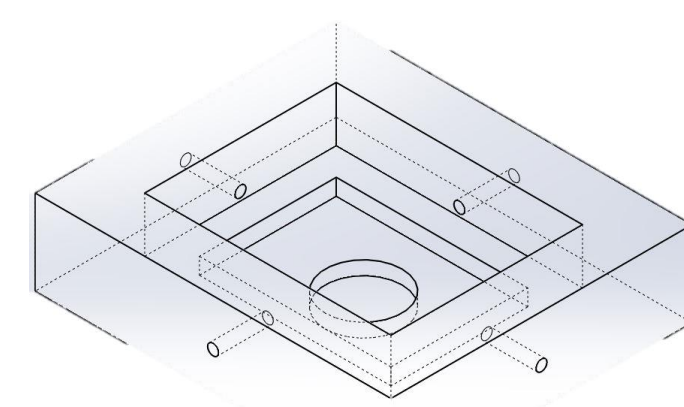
Solidworks design of device. Figure 3 : Image of final 3D printed device
